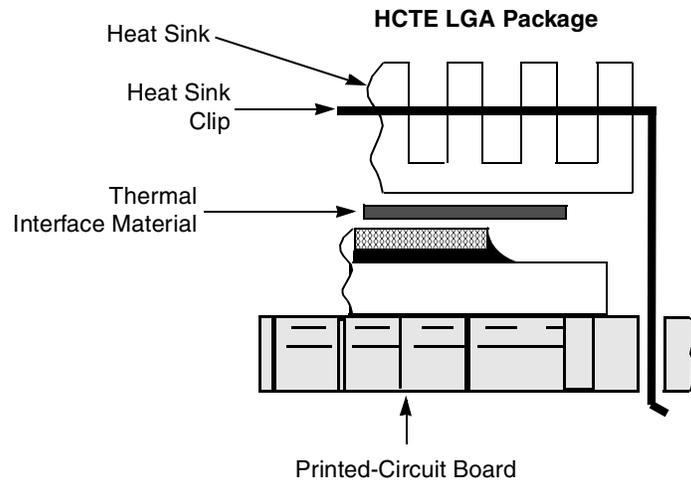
LGA Package Exploded Cross-Sectional View with Several Heat Sink Options
